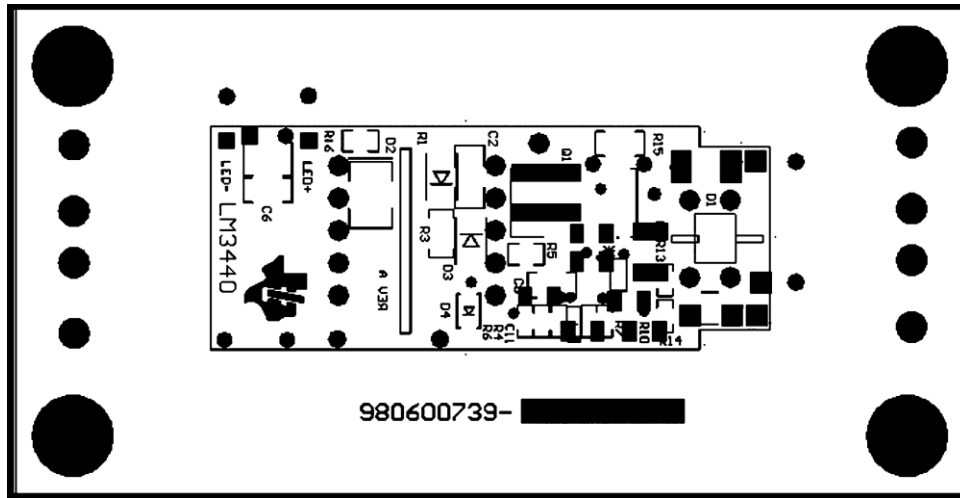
Bottom Layer Assembly Drawing (Bottom View)
